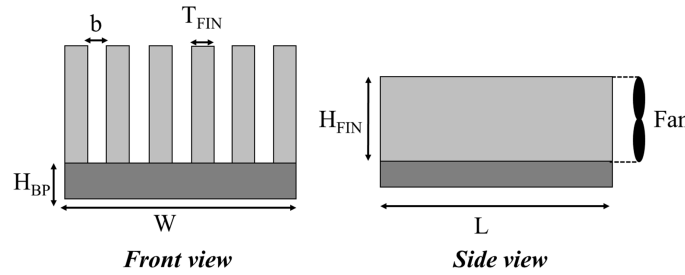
Geometrical parameters of extruded heat sink and fan.
